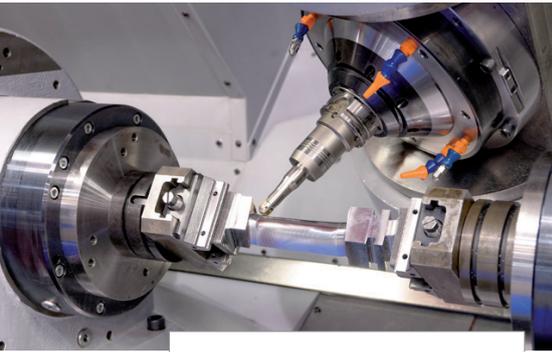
Milling of turbine blades with an X+ZrCN-coated ball plate.
